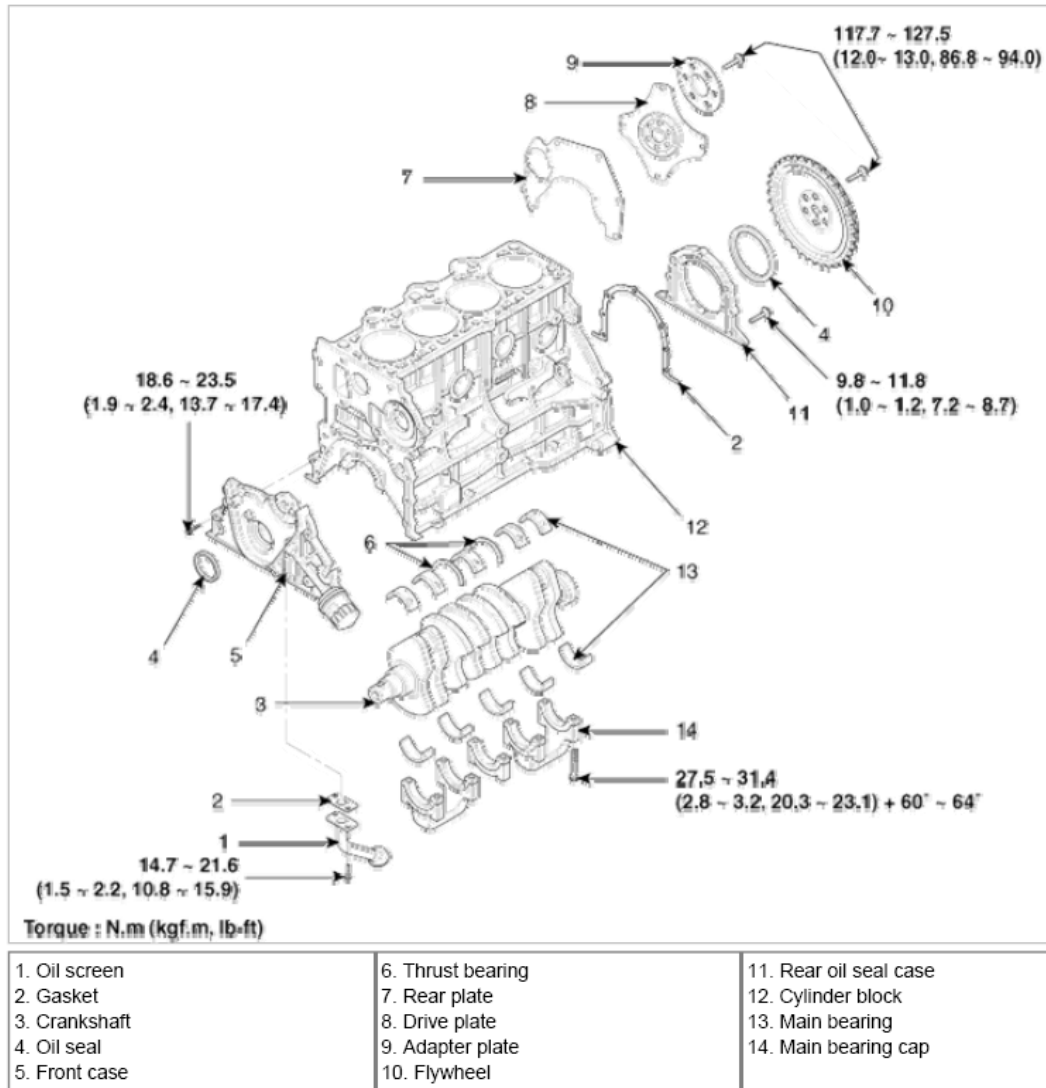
Identifying Cylinder Block Components With Torque Specifications (1 Of 2)
